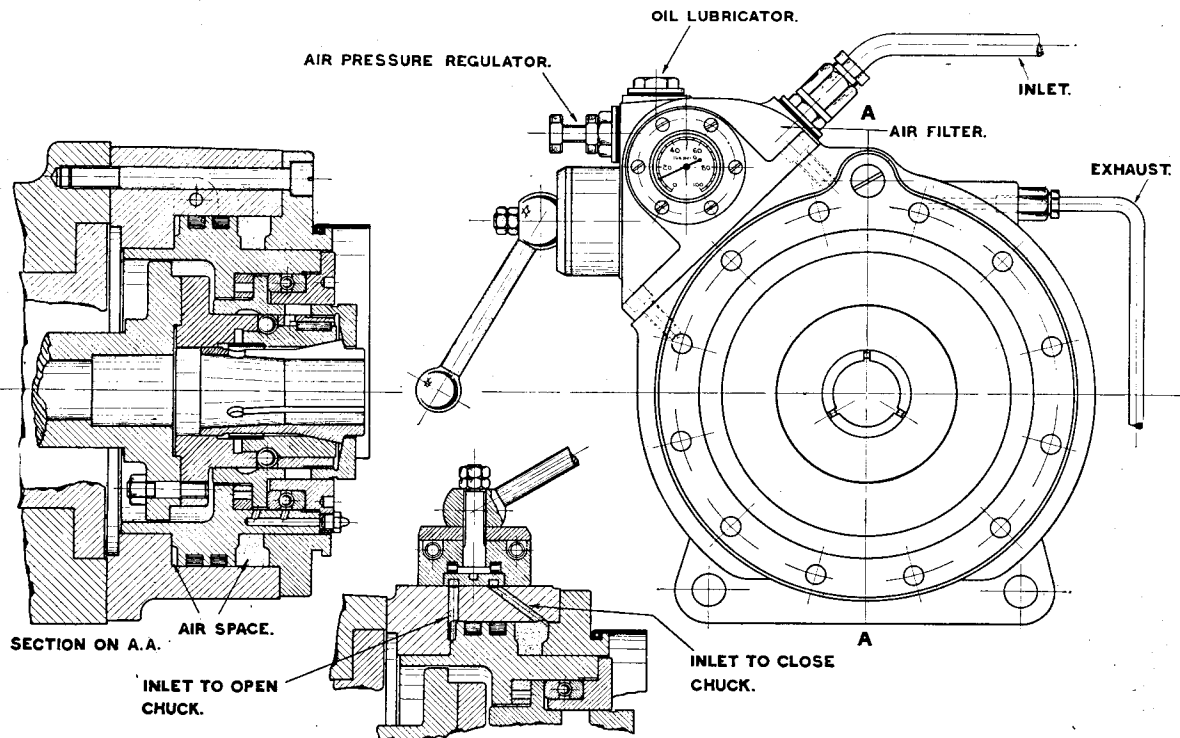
Air-operated collet chuck for bar feed, showing detail section of control valve for opening and closing chucks. (Messrs. H. W. Ward and Co. Ltd.).
